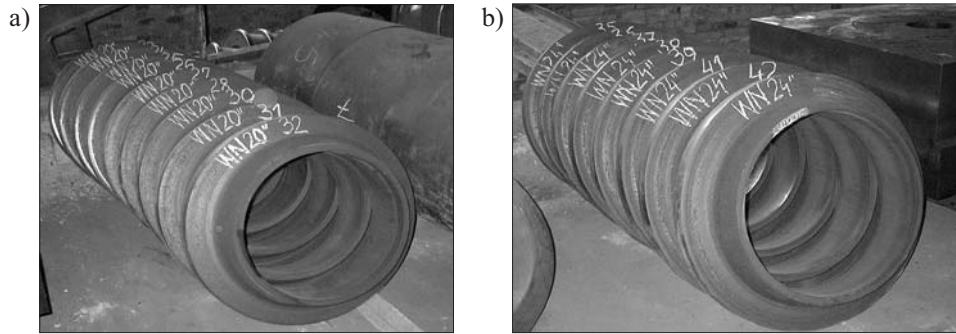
Welding neck* rings obtained in the industrial tests: a) 20'' rings; b) 24'' rings
